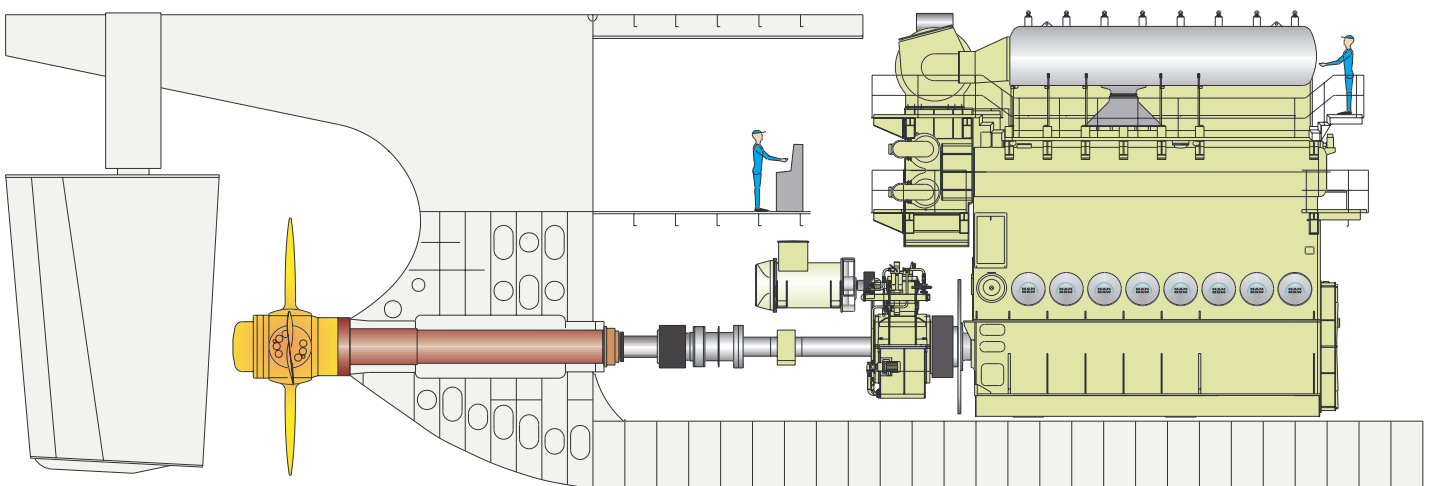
Propeller equipment type VBS - ODS (8S50MC-C engine, Renk tunnel gear, VBS1680 propeller)
